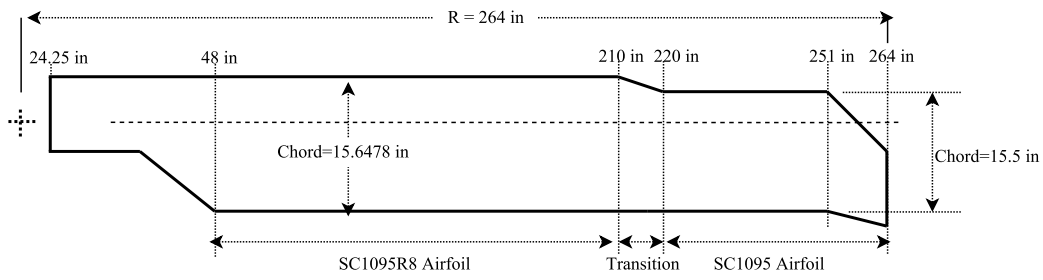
2-D View of the S-76 Main Rotor Blade
